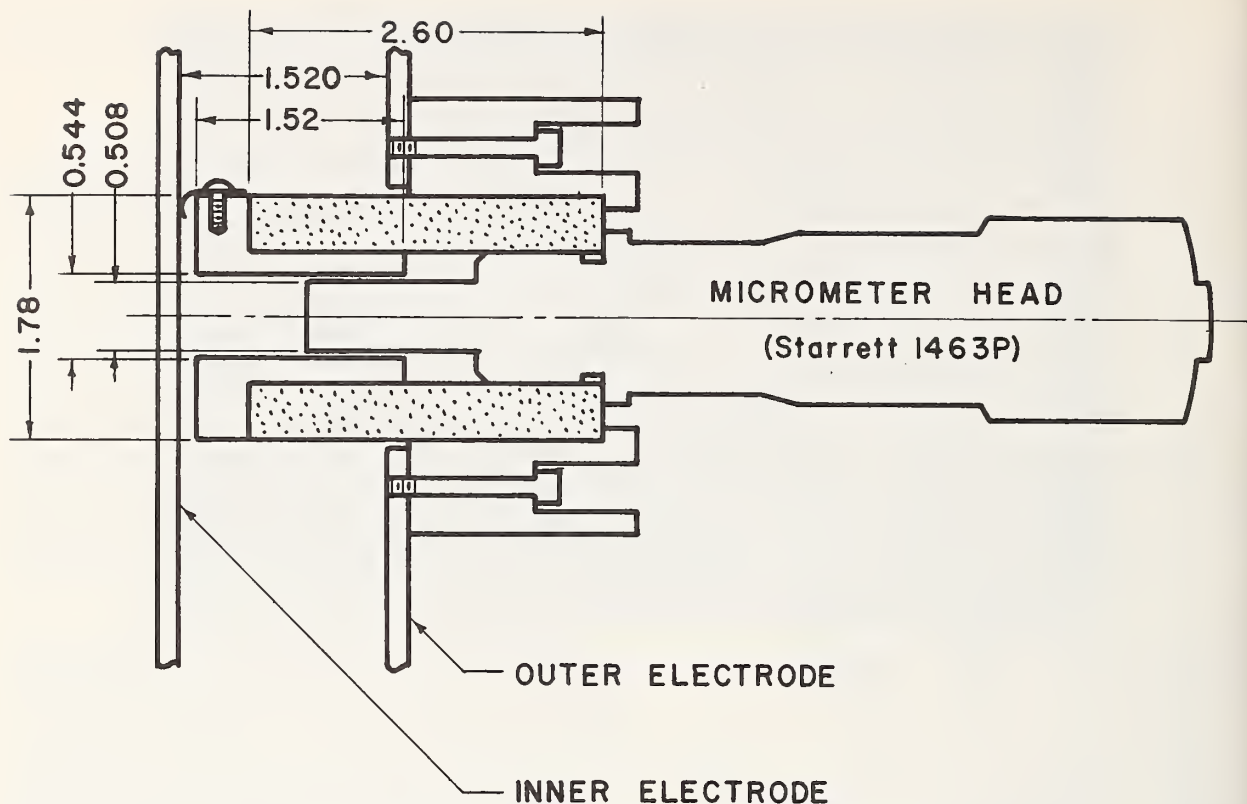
Details of construction and mounting of micrometer capacitor in Q-meter sample holder. Dimensions in centimeters.
